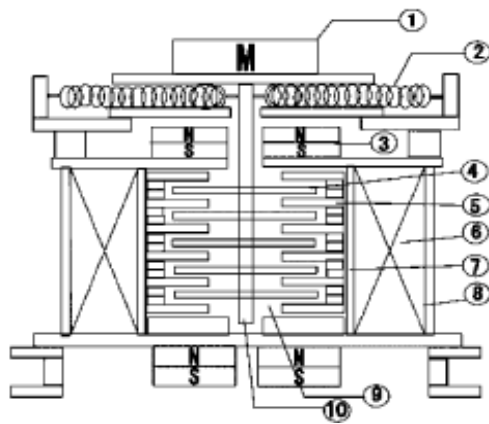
2DOF-type Damper. Notes: (1)mass; (2) spring; (3) permanent magnet; (4) inner disc; (5) outer disc; (6) coil; (7) inner pipe; (8) outer pipe; (9) MRF; (10) shaft.(after T. Pranoto et al, 2005)
